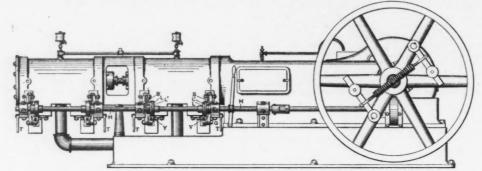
SIDE ELEVATION OF 50-HP. GAS ENGINE.
